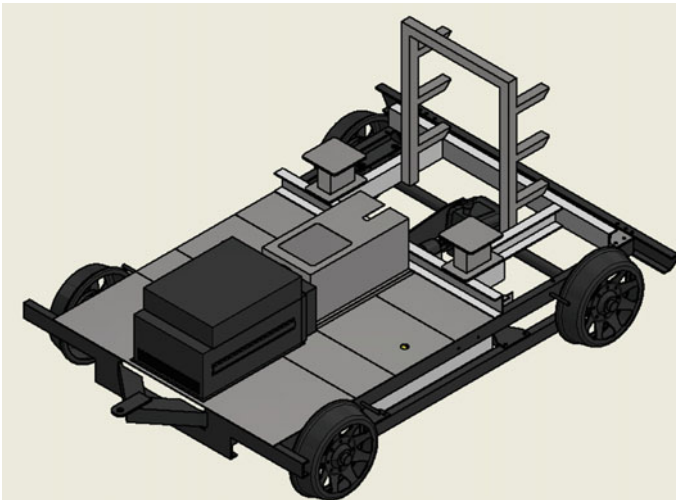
3D CAD drawing of the retrofitted vehicle as-built before being tested
